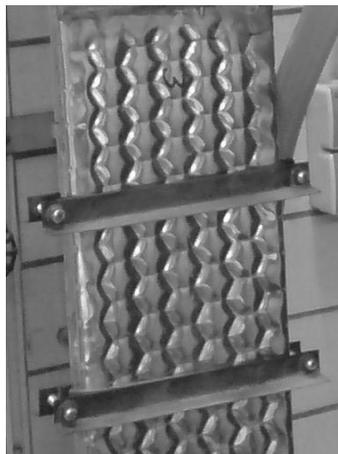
Conduit of vault-structured sheet metal of stainless steel [11]
